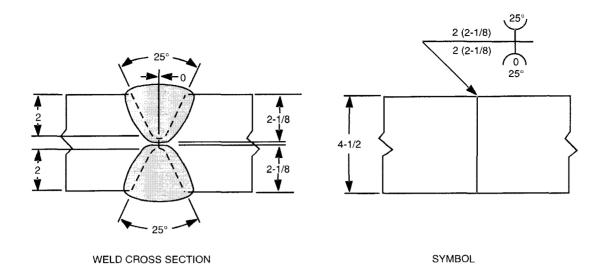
Groove Weld Symbol with Combined Dimensions
